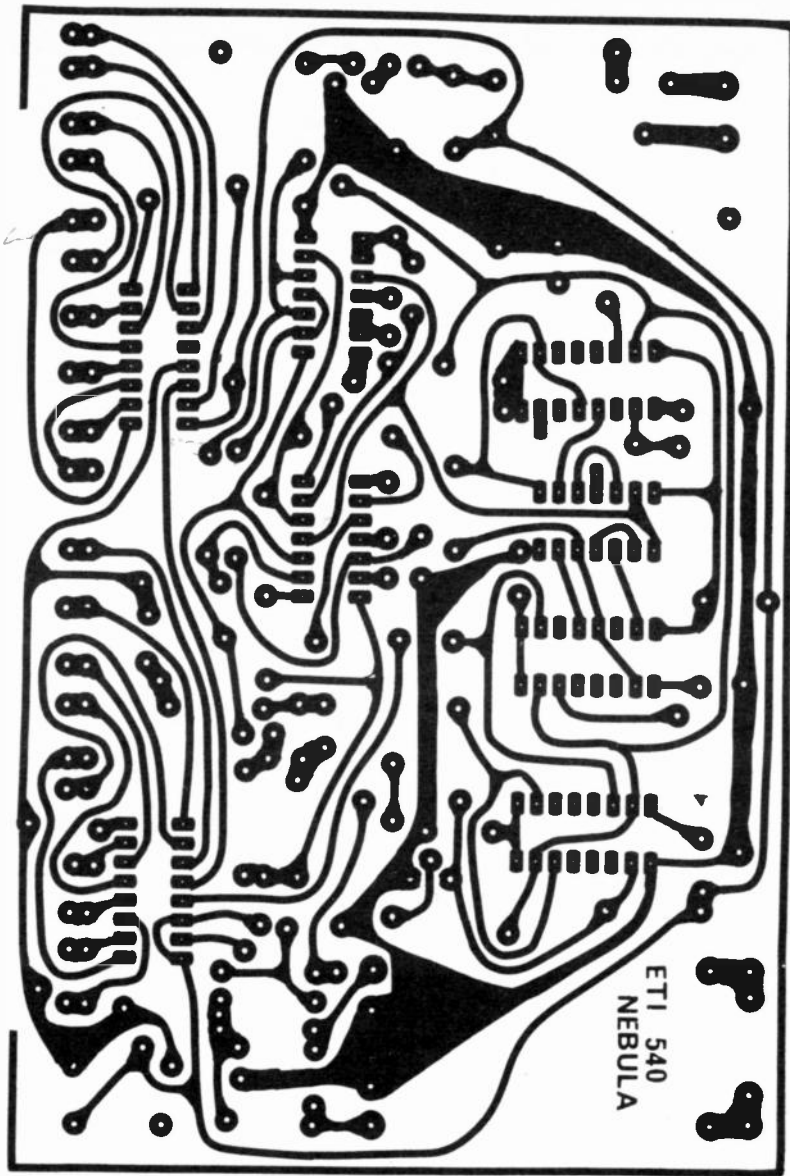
Printed-Circuit board layout for the timer. Full size 153 x 100 mm.
